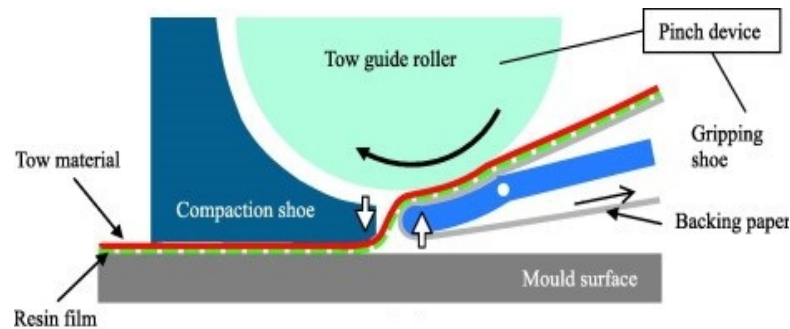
The machine head of the CTS method, placing tows onto a mould surface [103].
